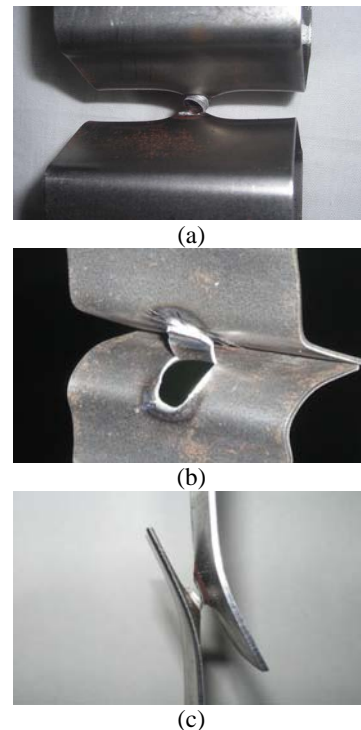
Failed spot weld joint connection. (a) U tension coupon. (b) Coach peel coupon (c) Lap shear coupon
